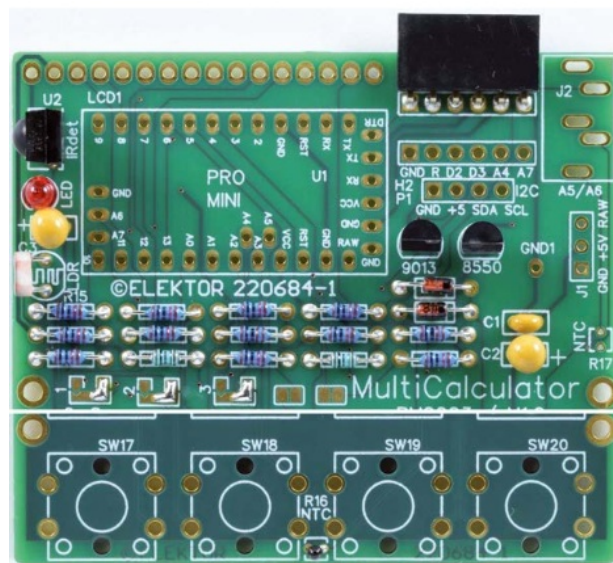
C1...C3, LED, LDR, T1 and T2, IR receiver U2 and the NTC R16 soldered.
